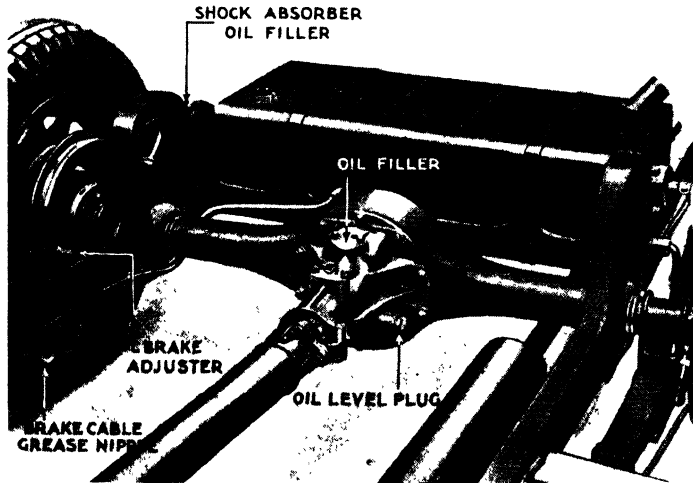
TYPICAL PROPELLER SHAFT AND FINAL DRIVE LAY-OUT, EXEMPLIFIED BY THE STANDARD FOURTEEN
